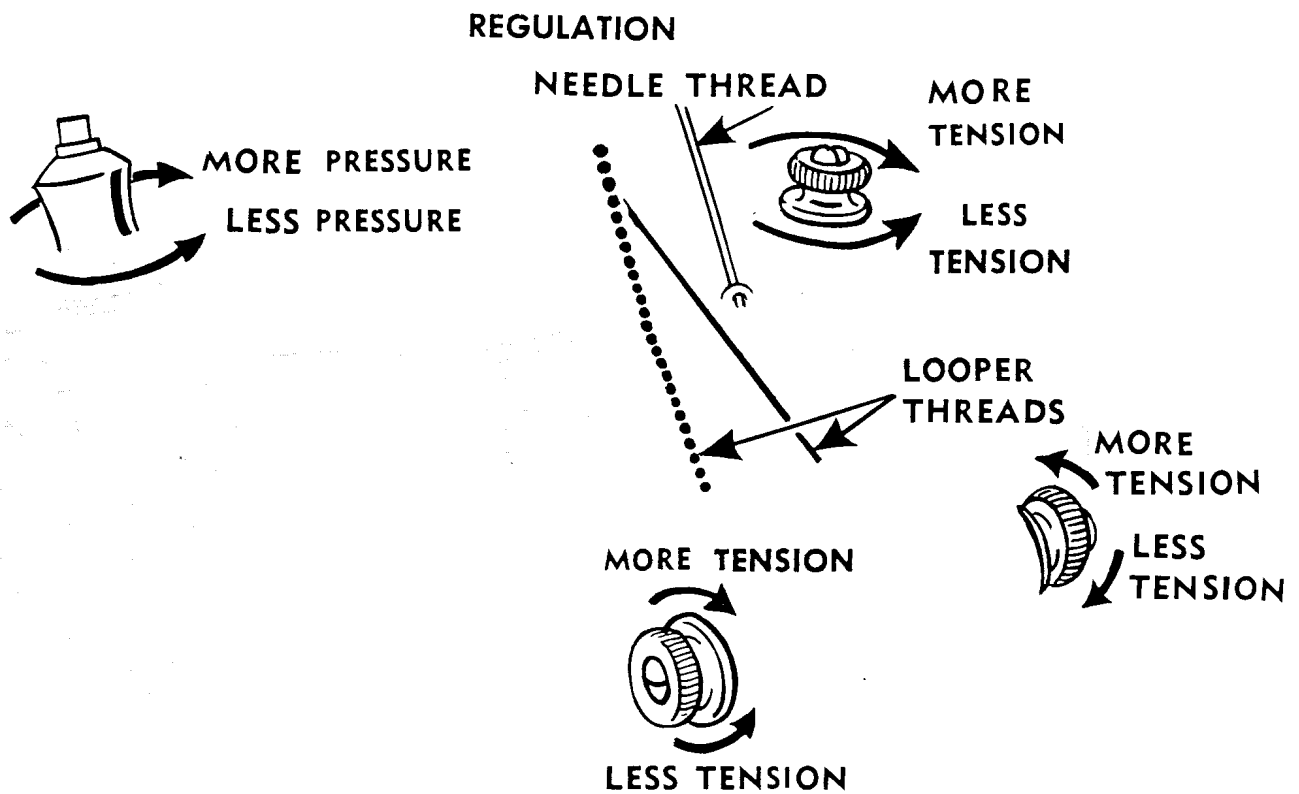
Regulating Tension of Threads and Pressure of Presser Foot on Material
